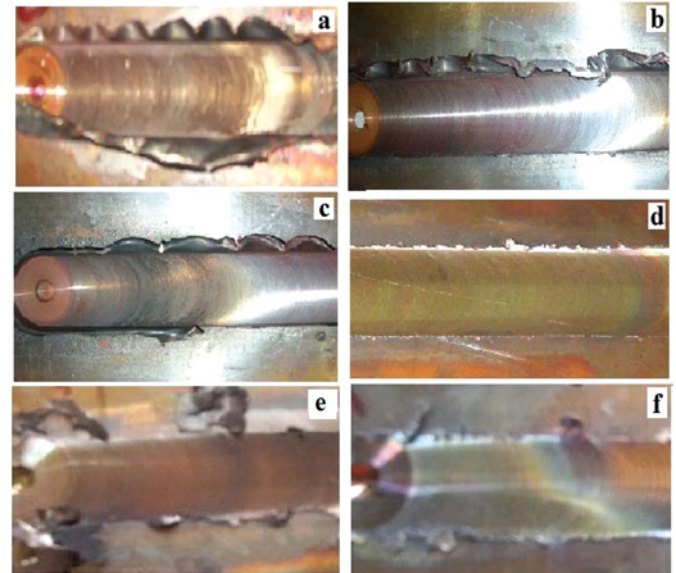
Surface morphologies of the of FSW joints made by (a) TC, (b) TT, (c) TR, (d) SQ, (e) PT, and (e) HX tool pin profiles (color figure available online).
